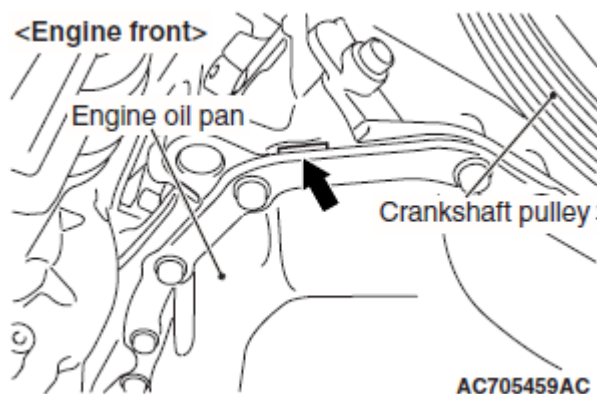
Identifying Engine Oil Pan And Crankshaft Pulley
